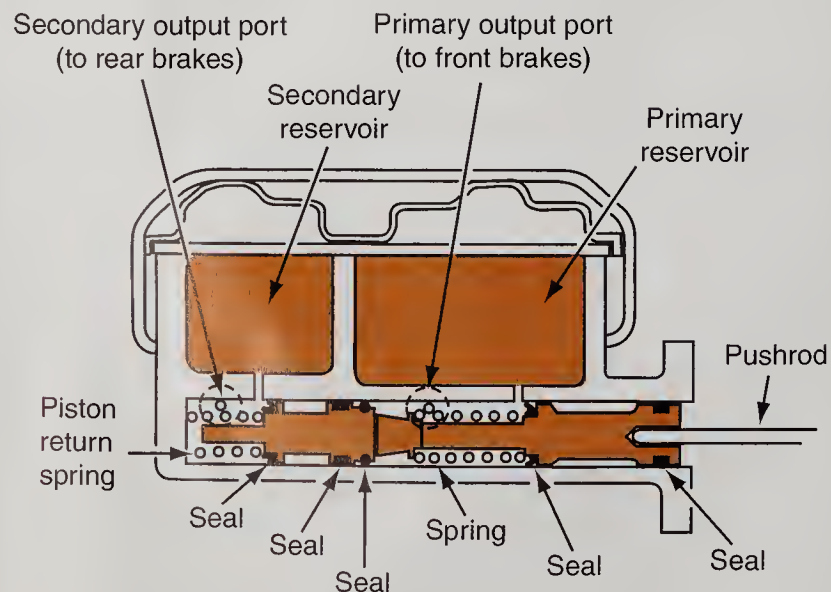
The master cylinder is a cylindrical pump with two pistons that develop pressure in the hydraulic lines to the front and rear brakes.
